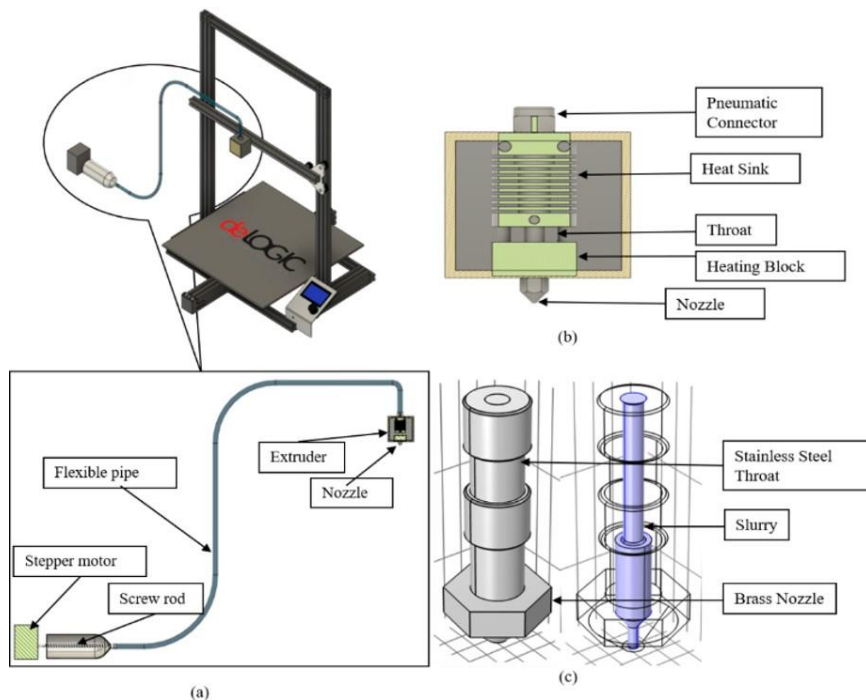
Customized 3D-printer setup (a) Extrusion system (b) Extruder (c) Geometry of nozzle and slurry.
